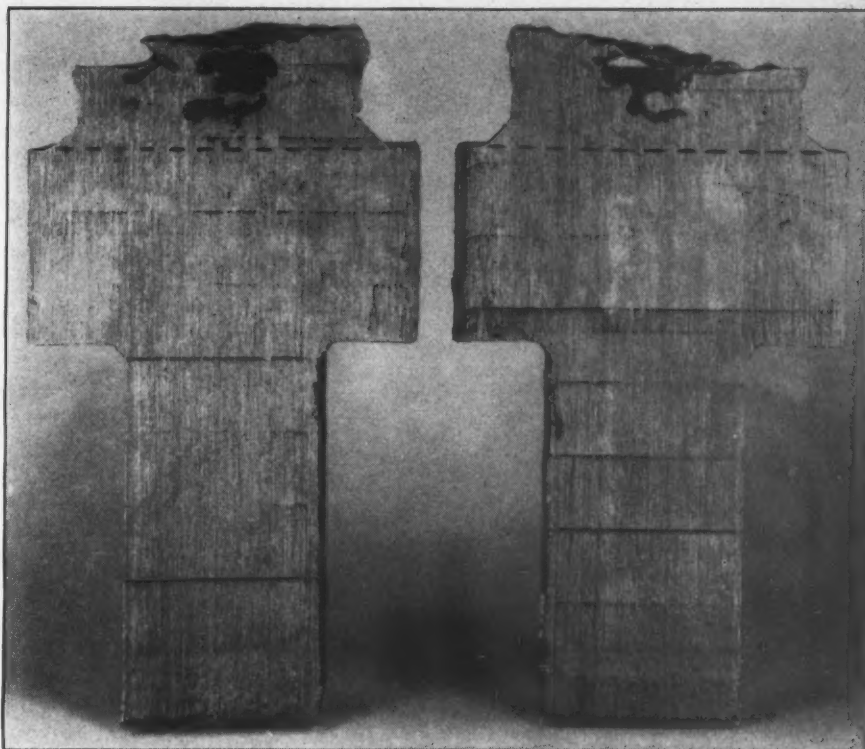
Class B steel test casting;  $2\frac{1}{2}$  lb. steel exothermic powder used; 80 per cent yield of good casting. In this test pouring stopped at bottom of riser near dotted line shown.
